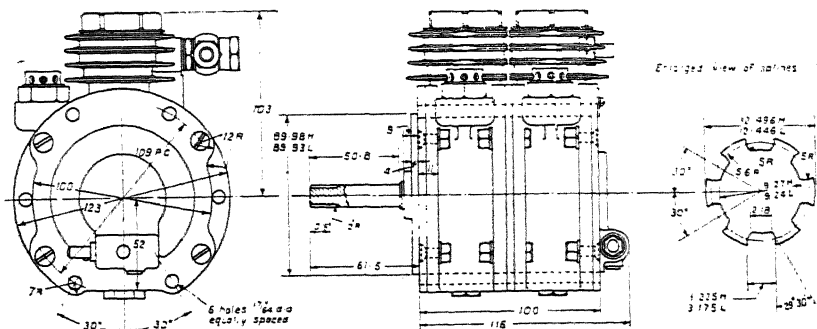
DIMENSIONS OF AW COMPRESSOR
